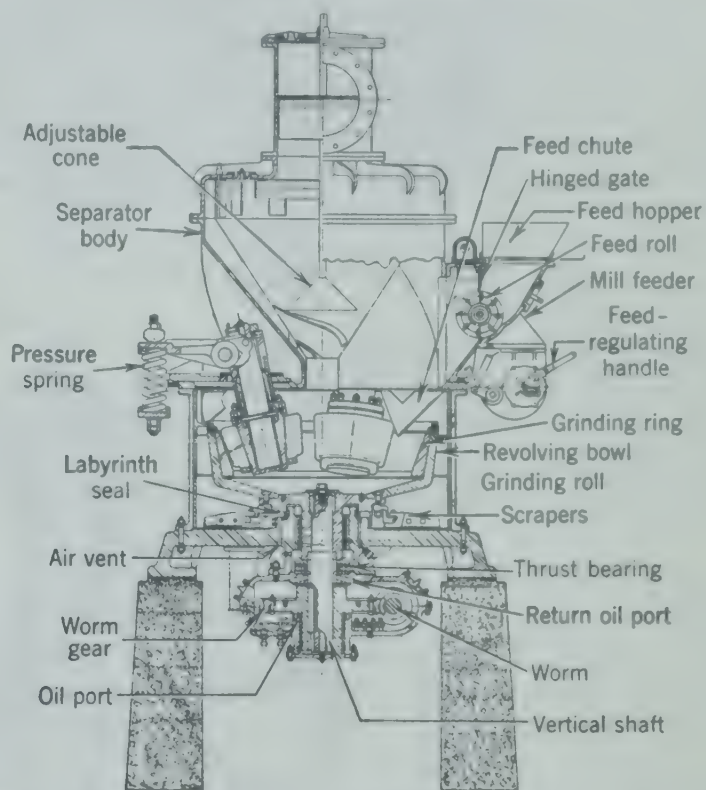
Cutaway and sectional diagram of bowl mill with air classifier or separator. (Combustion Engineering Co.)
